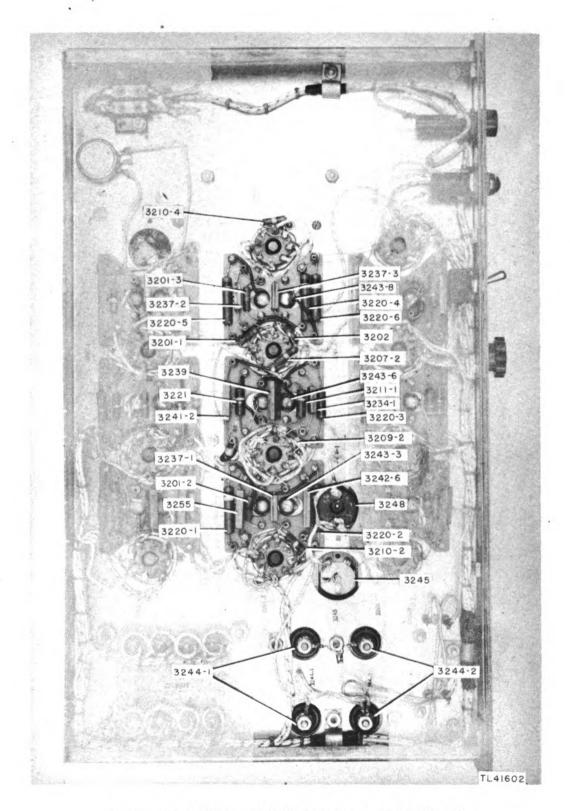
Calibrator I-189-A, bottom of chassis (2).
